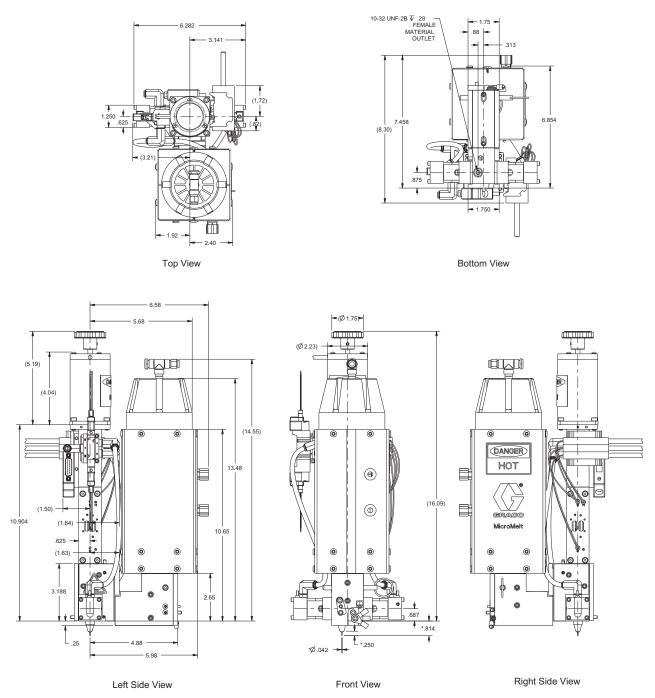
Micro (Hot) Melt Valve Mounting Diagram 1
